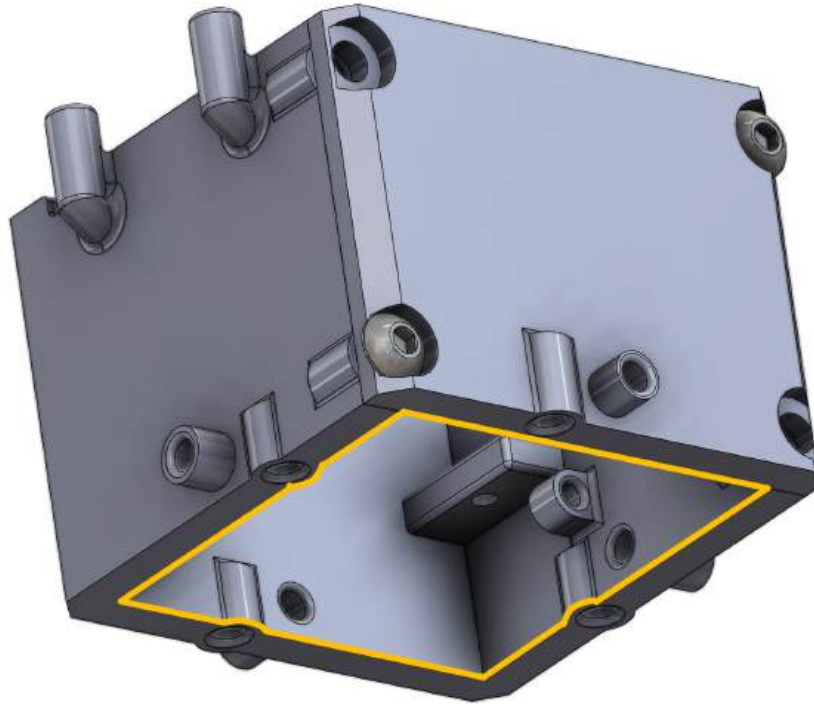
Bottom view of housing with highlighted edges that will be sharp when removed from the printer.
